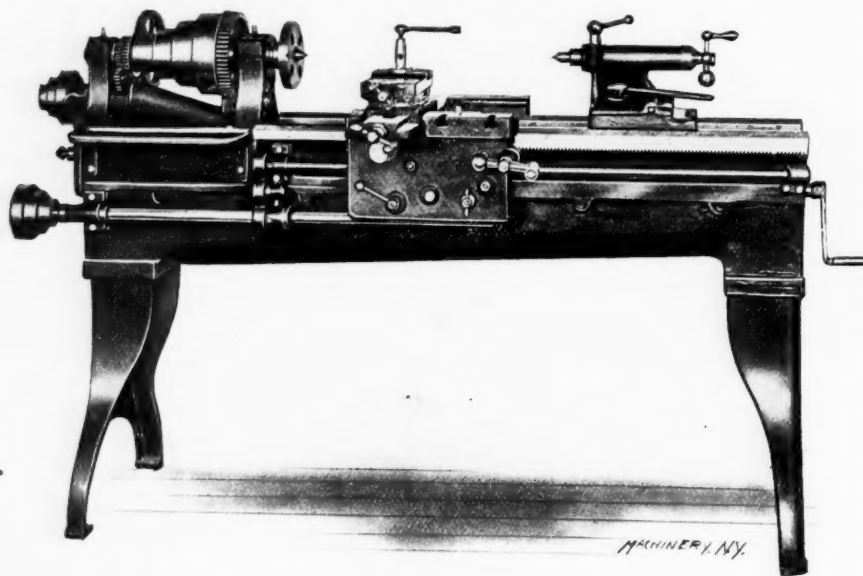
The Barnes Sliding Extension Gap Lathe.
